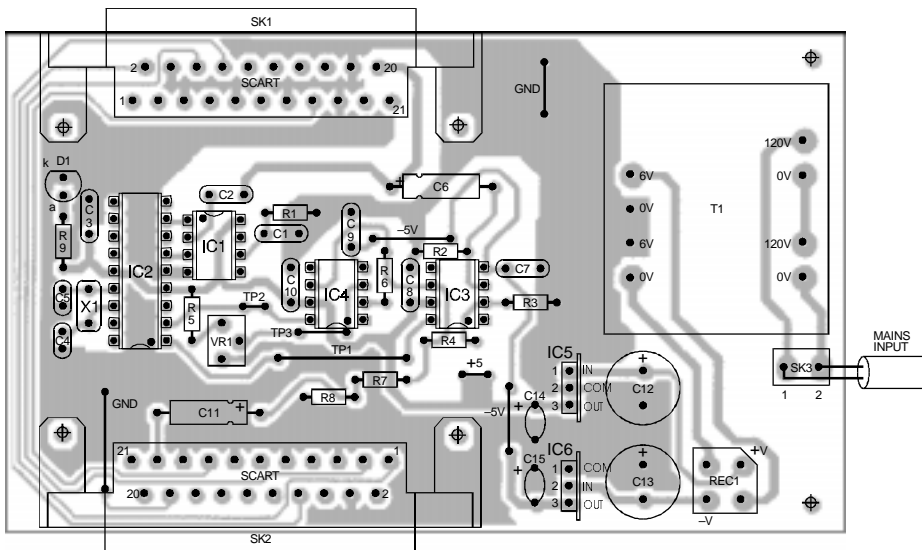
Printed circuit board component layout and (approximately) full-size copper foil master pattern for the PIC Video Cleaner. The SCART sockets are bolted to the PCB via small right-angle brackets.
